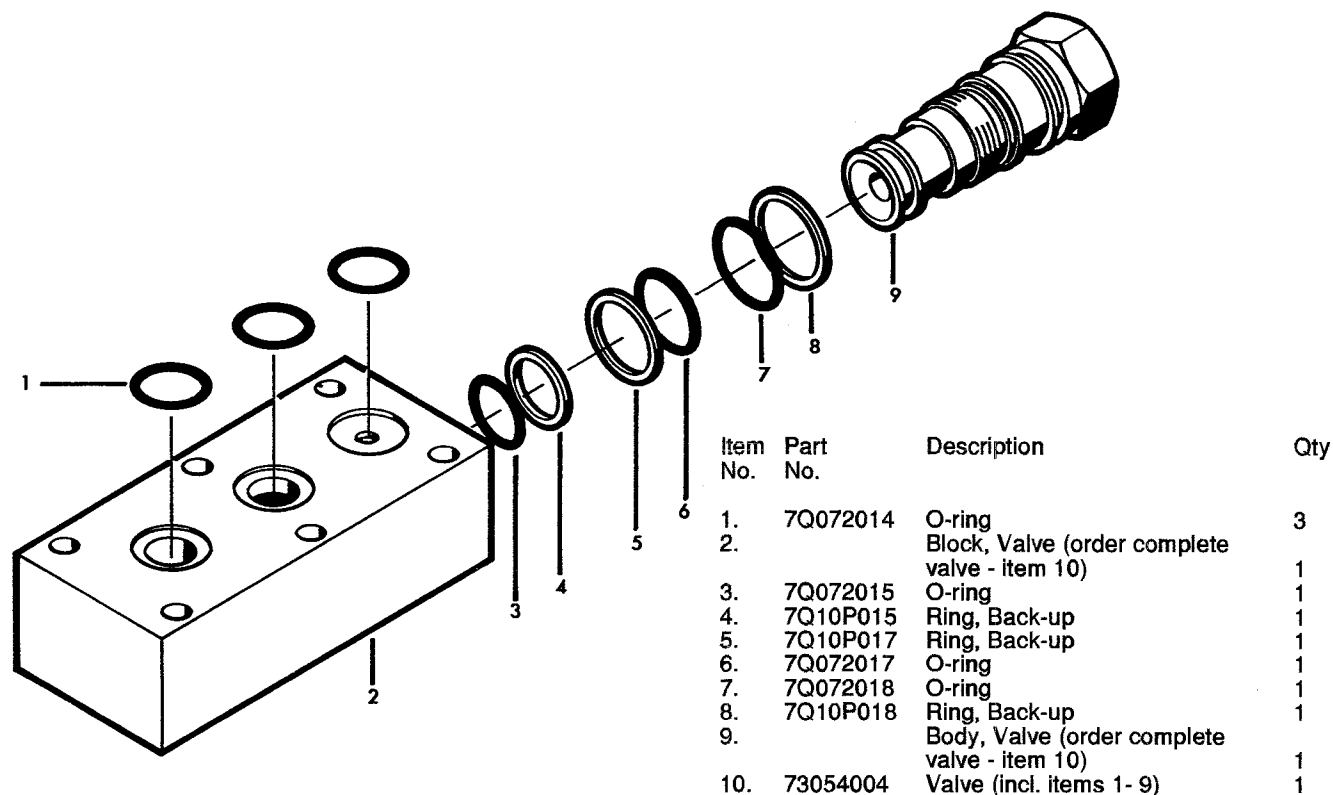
Locking /Holding Valve (Part Number 73054004)
